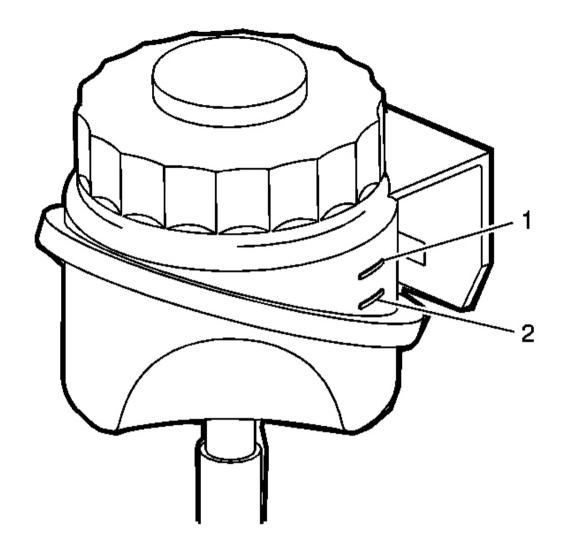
Reservoir To Max Level Courtesy of GENERAL MOTORS CORP.
